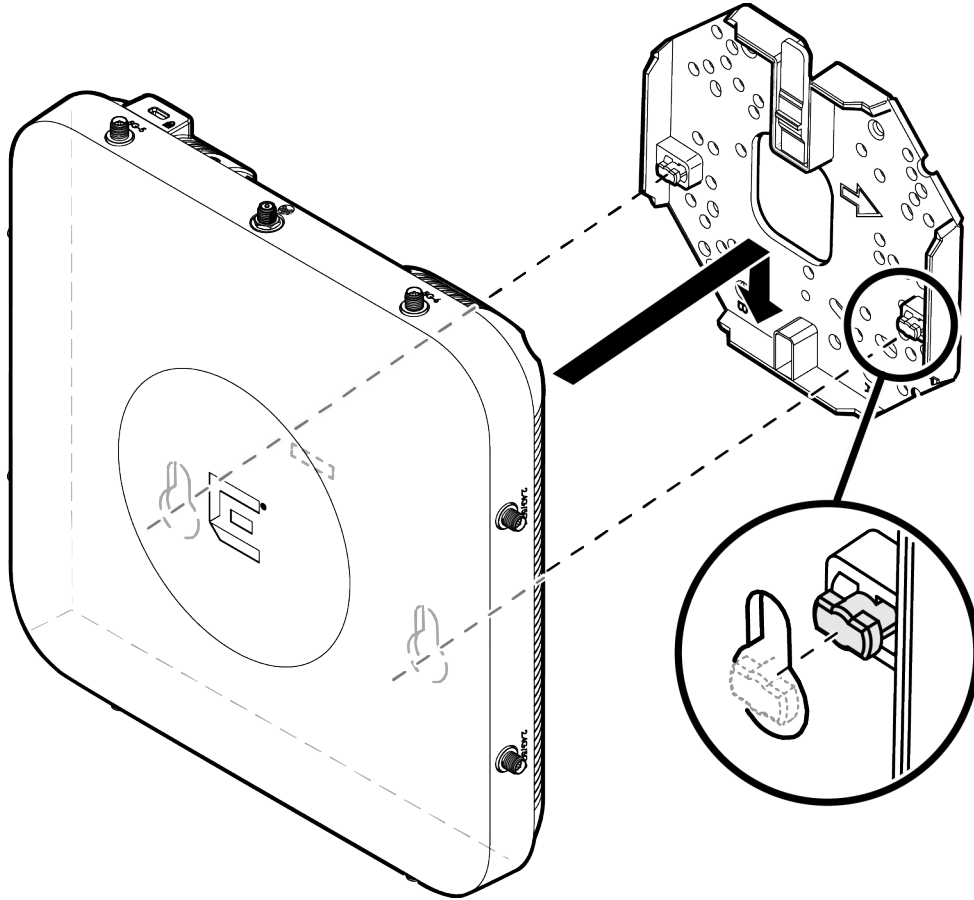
Mounting the access point using the WS-MBI-WALL04 bracket (when bracket corners are broken off)
